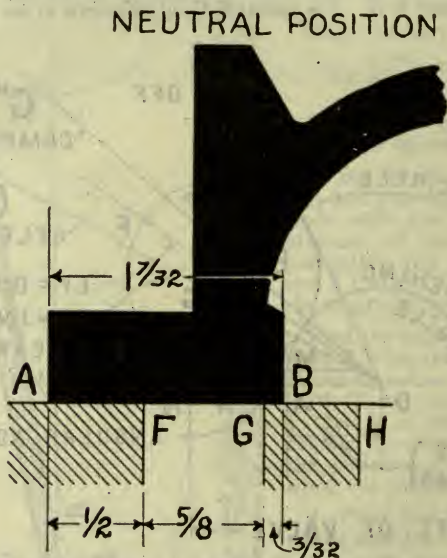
How to lay out the slide valve. I. With the dimensions obtained by the Bilgram diagram the length of the face is determined by sketching one end of the valve in its central or *neutral* position as here shown.
